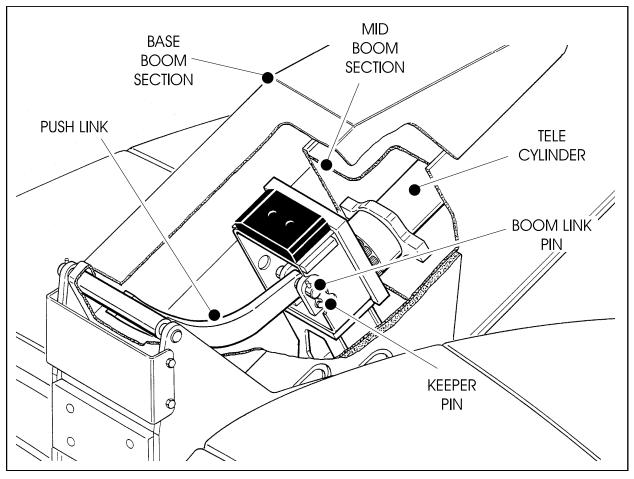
Boom Assembly Cutaway - S Models - Sheet 3 of 3
